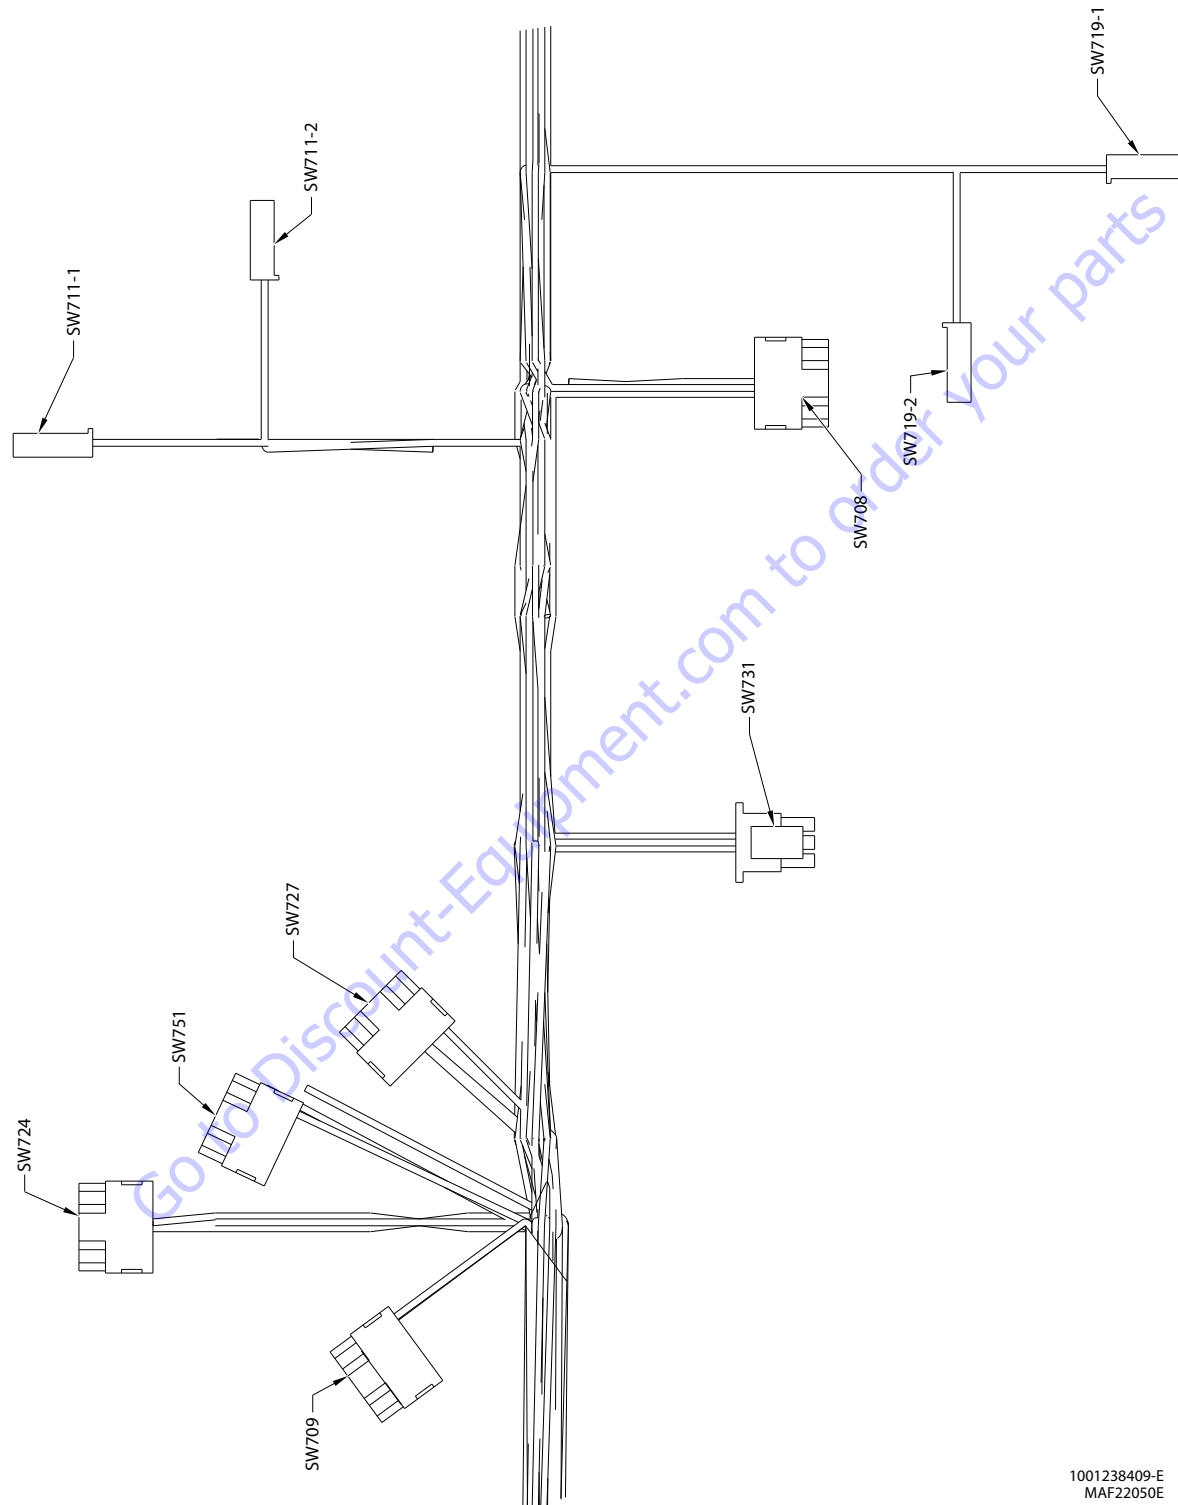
Platform Box Harness - Sheet 4 of 6
